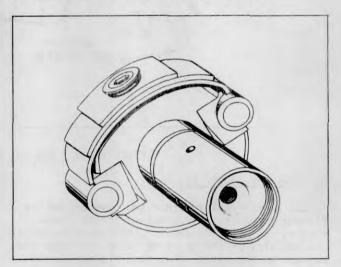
Typical Assembly Of Distributor Rotor And Leaf Springs
